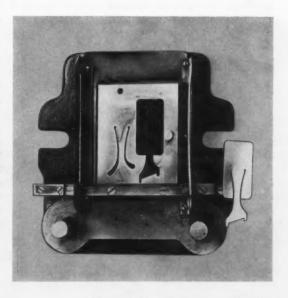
Blanking die with decarburized edges in the contoured holes which could not be removed because of grinding difficulties
